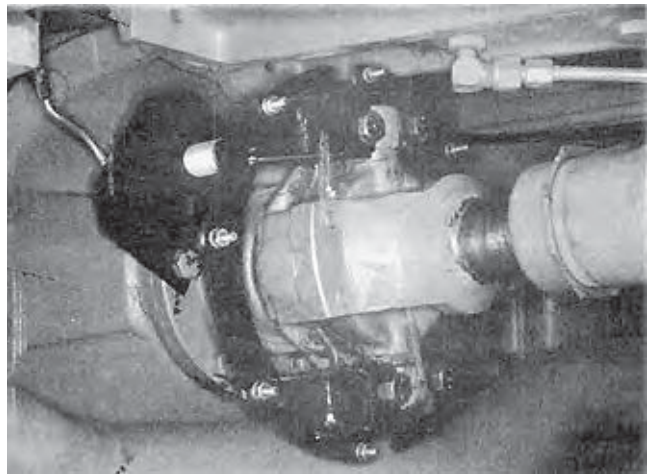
Typical Wheel Speed Sensor Mounting.
